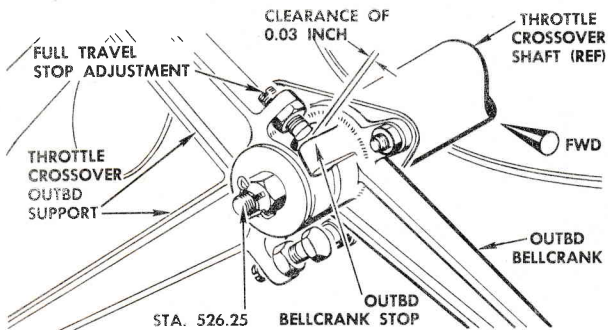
Throttle Control System Rigging (Sheet 6 of 8)
